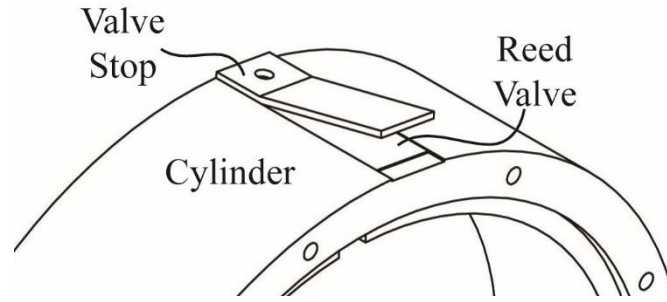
Isometric View of Valve and Valve Stop Assembly on Cylinder
